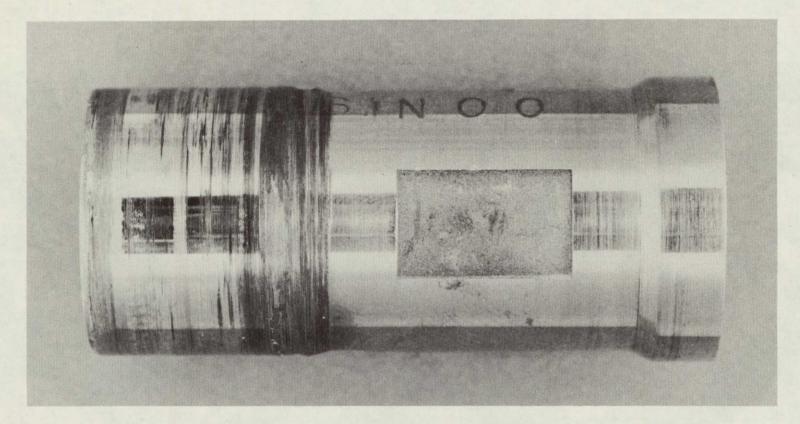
Helium Seal Assembly Following Bearing Failure (Build 8, Posttest 332)
